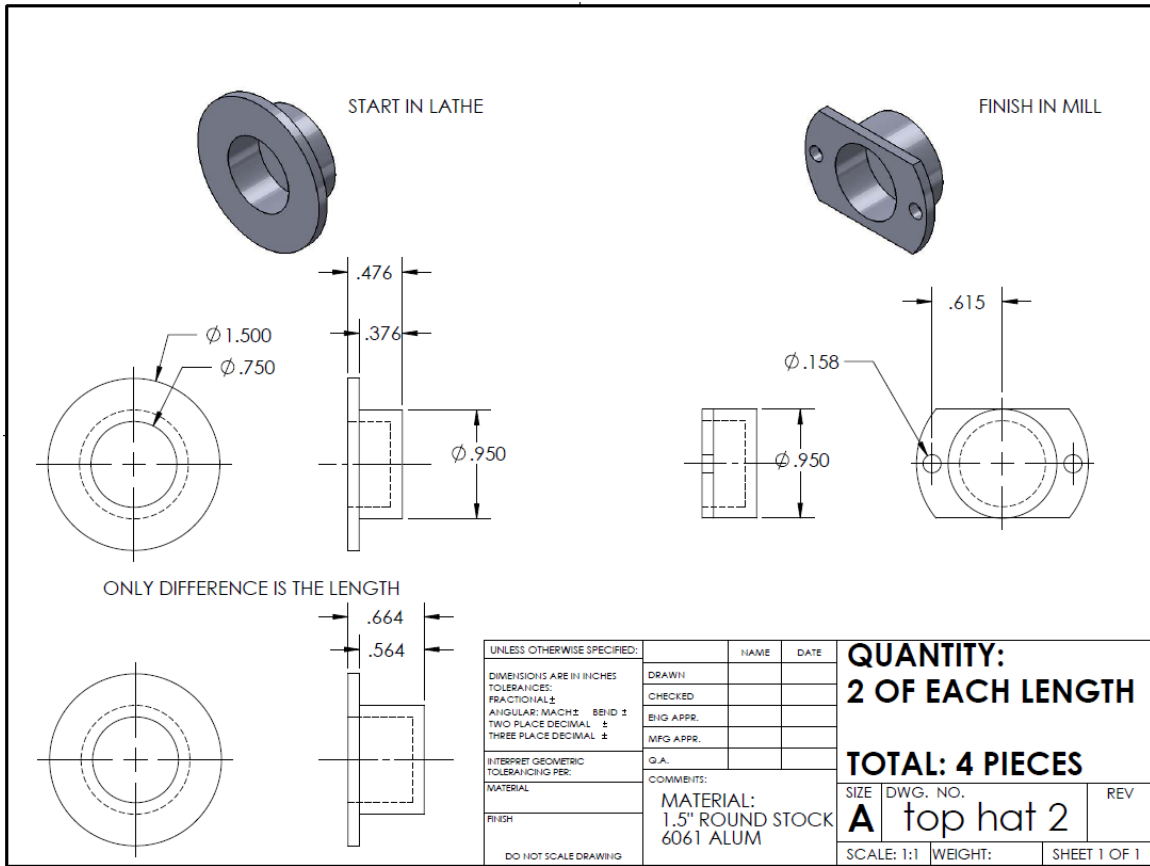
Engineering Drawing for Manufacturing of Magnet “Hats”
